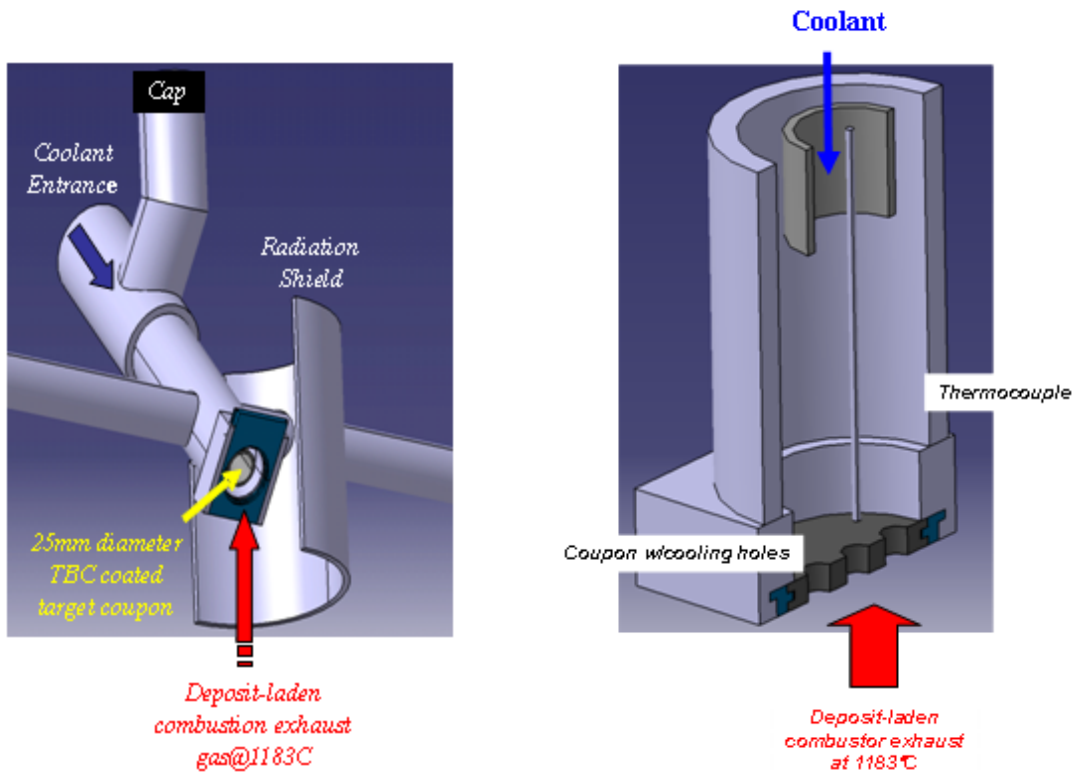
TADF test coupon holder redesign with backside film cooling
